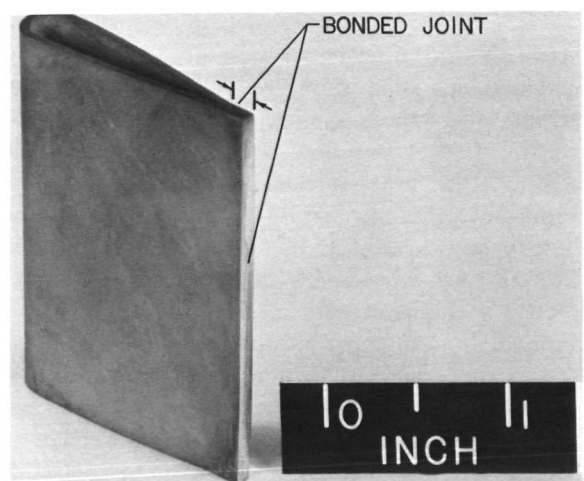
Diffusion-welded jet-engine blade.
